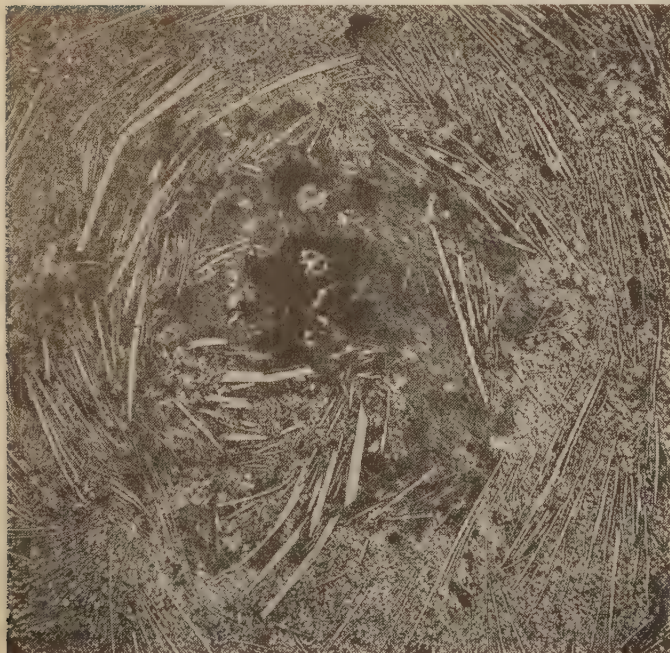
A portion of the diecasting shown here has not filled completely. In this instance, the alloy solidified before it filled the diecasting.
